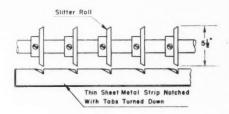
Diagrammatic sketch showing method of positioning slitter rolls.
